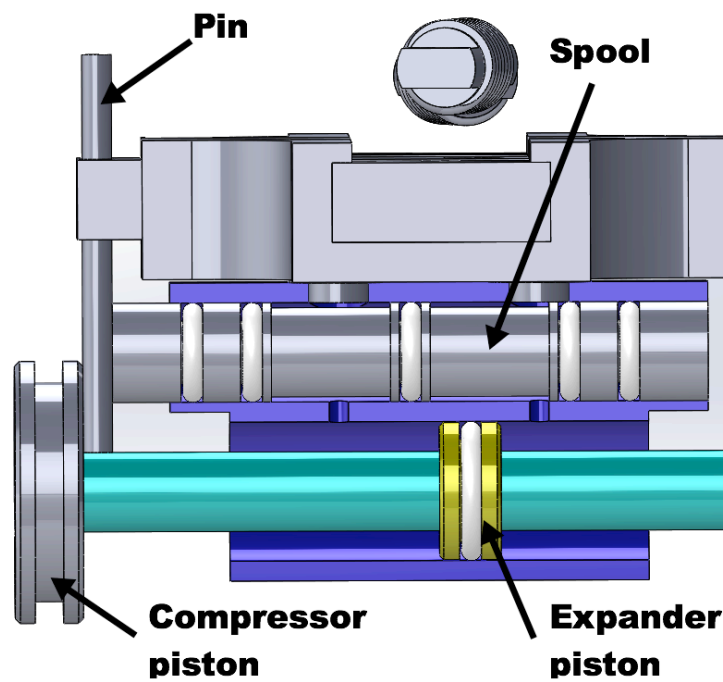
Horizontal cut of prototype number 3. The compressor and expansion pistons are visible and mounted on their shaft. The compressor piston actuates the bi-stable mechanism through the pin and the pin actuates the spool.
